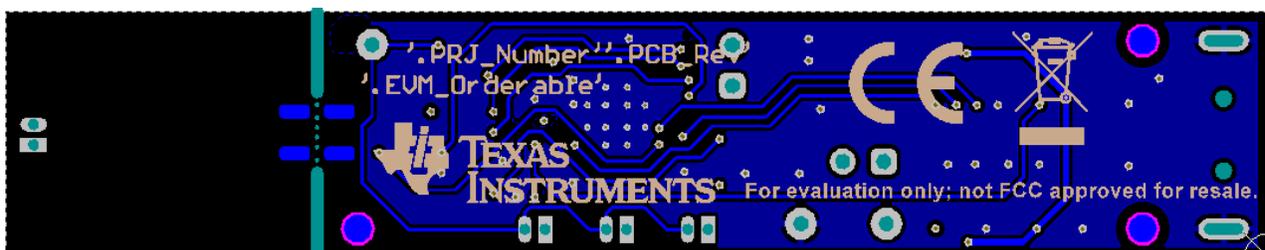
Bottom Assembly Layer as Viewed From the Bottom
